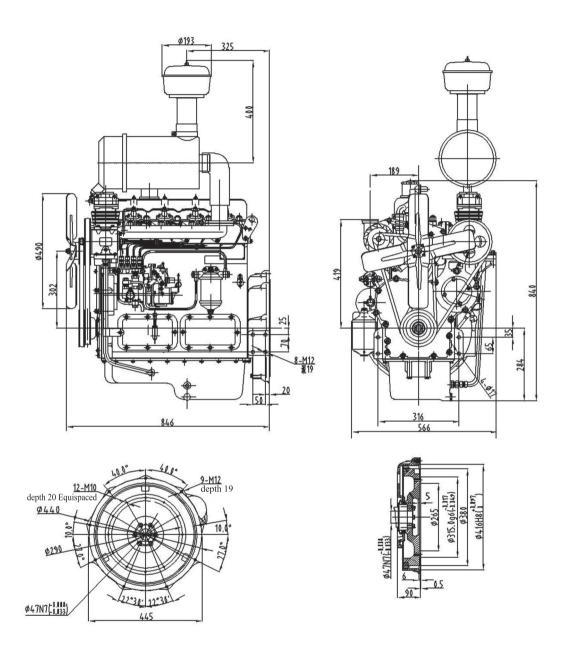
Outline drawing for ZHAG2-5D diesel engine
